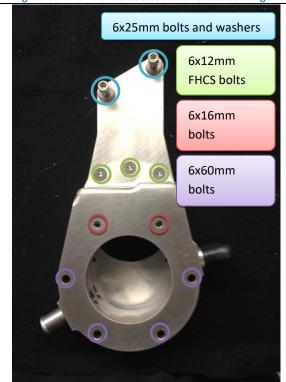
Front assembly with bolt sizes. Note - missing front intake tube flange.
